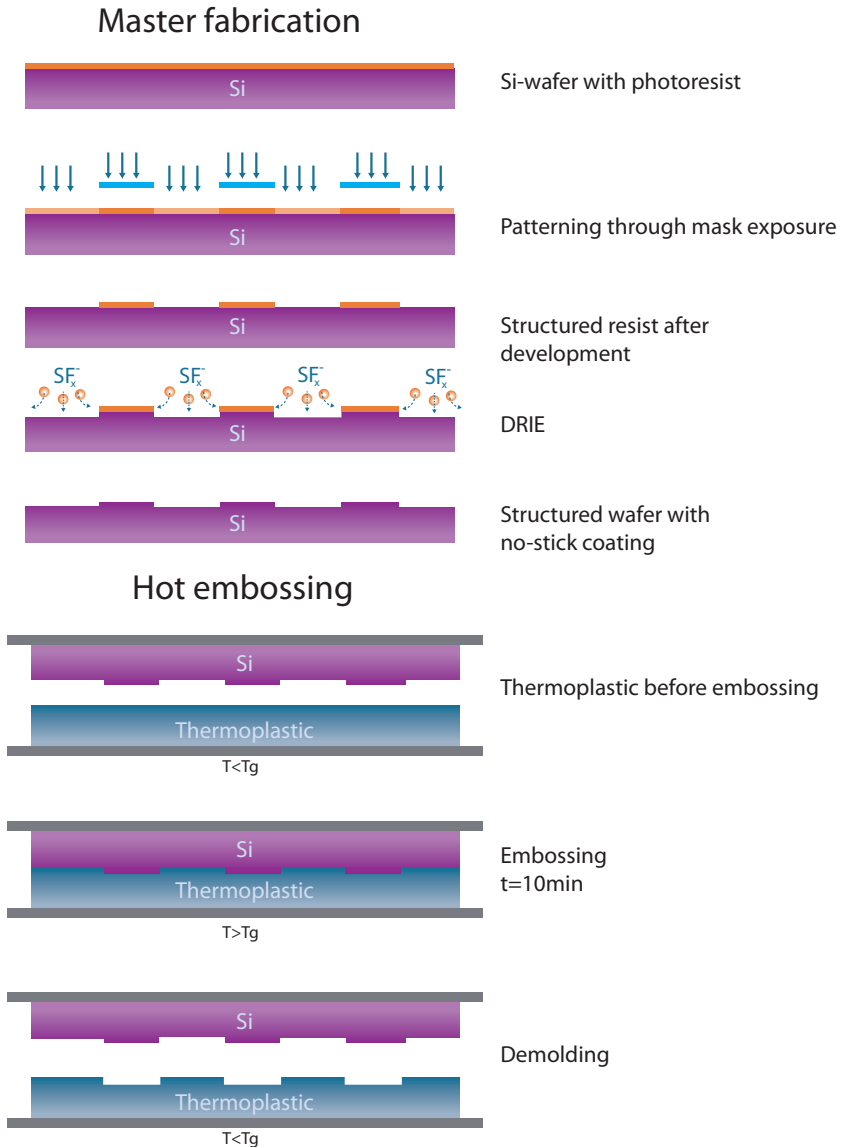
Schematics of the Si-stamp fabrication and hot embossing process.
